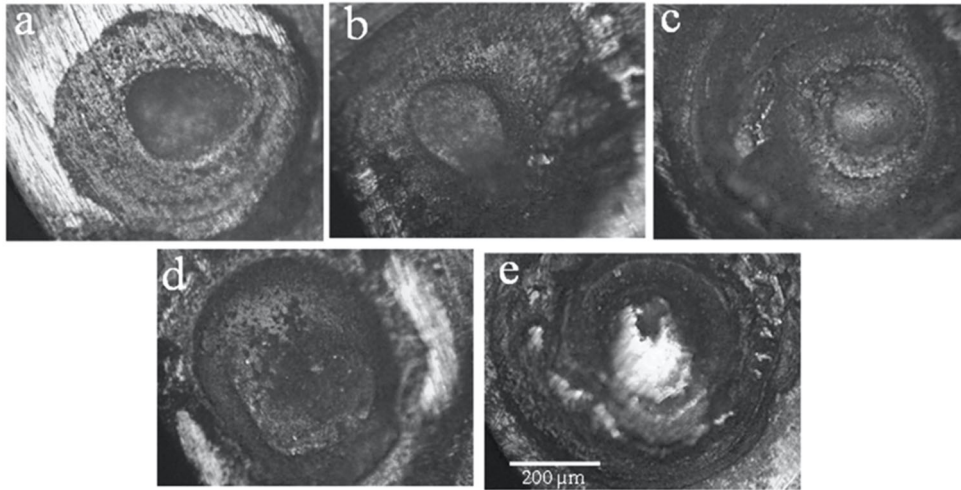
Weld nugget of the overlapped samples: a (sample 2); b (sample 3); c (sample 4); d (sample 5); e (sample 6)
